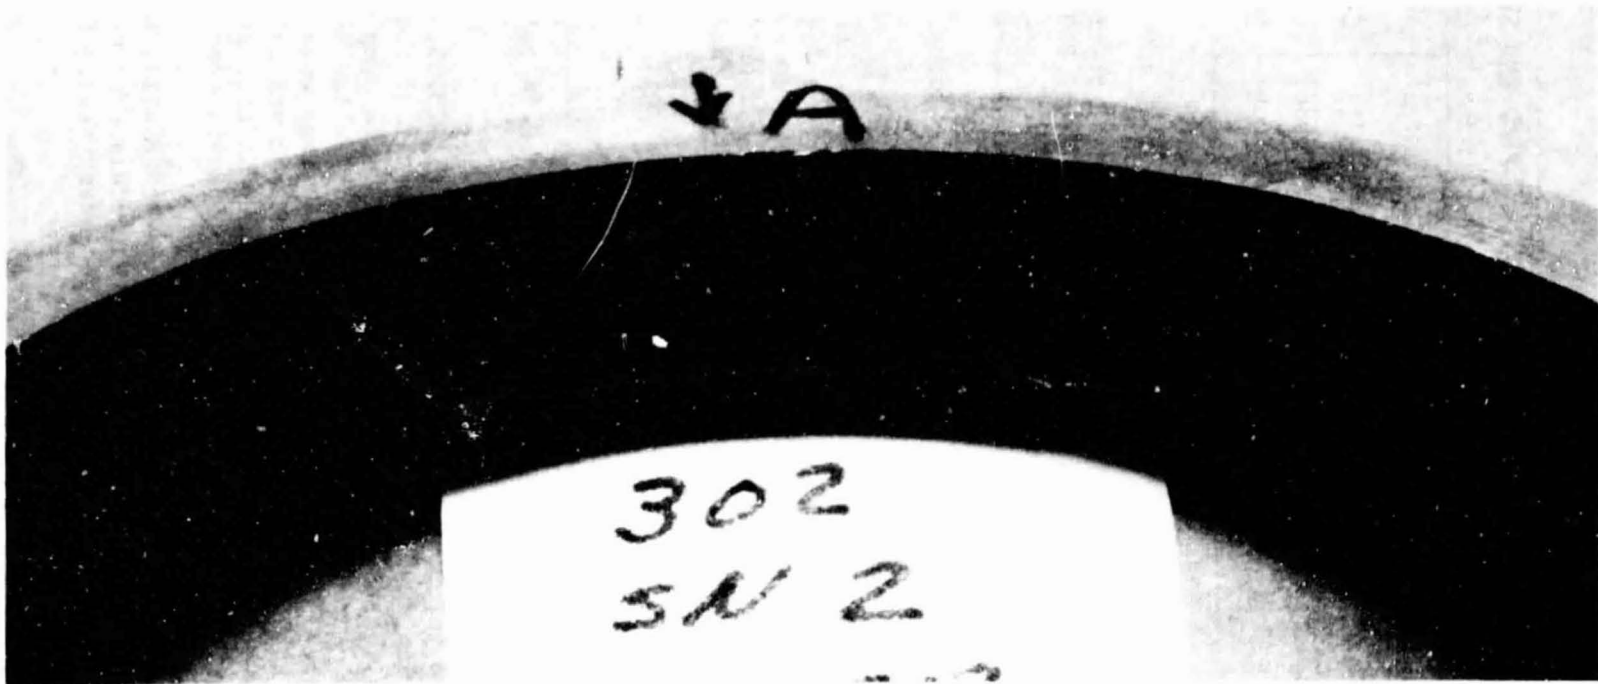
Pump End Primary Seal Ring, P/N 99RS010302, S/N 067602,
